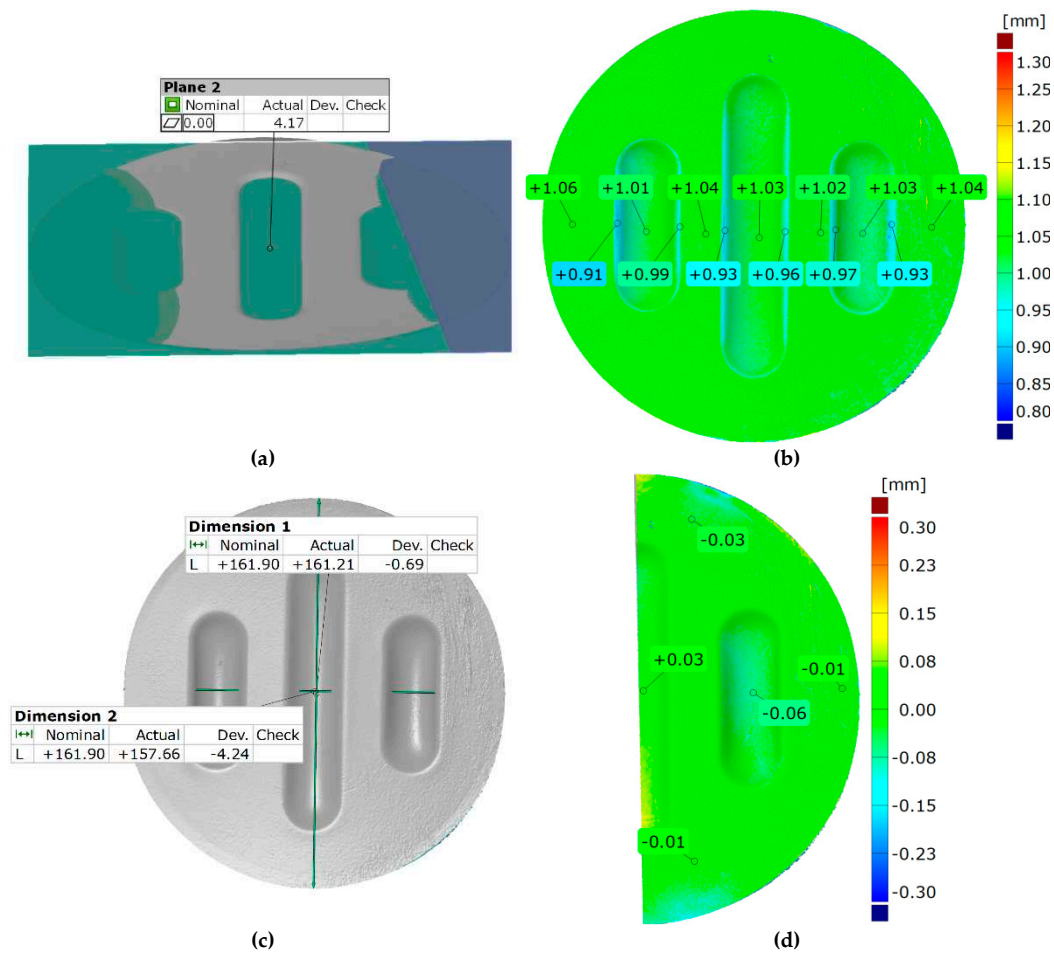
Results of measuring the geometry of the drawpieces formed using two inserts with a hardness of 50 ShA and three inserts with a hardness of 90 ShA: (a) surface flatness, (b) thickness, (c) changes in the diameter of the workpiece, (d) uniformity of forming.
